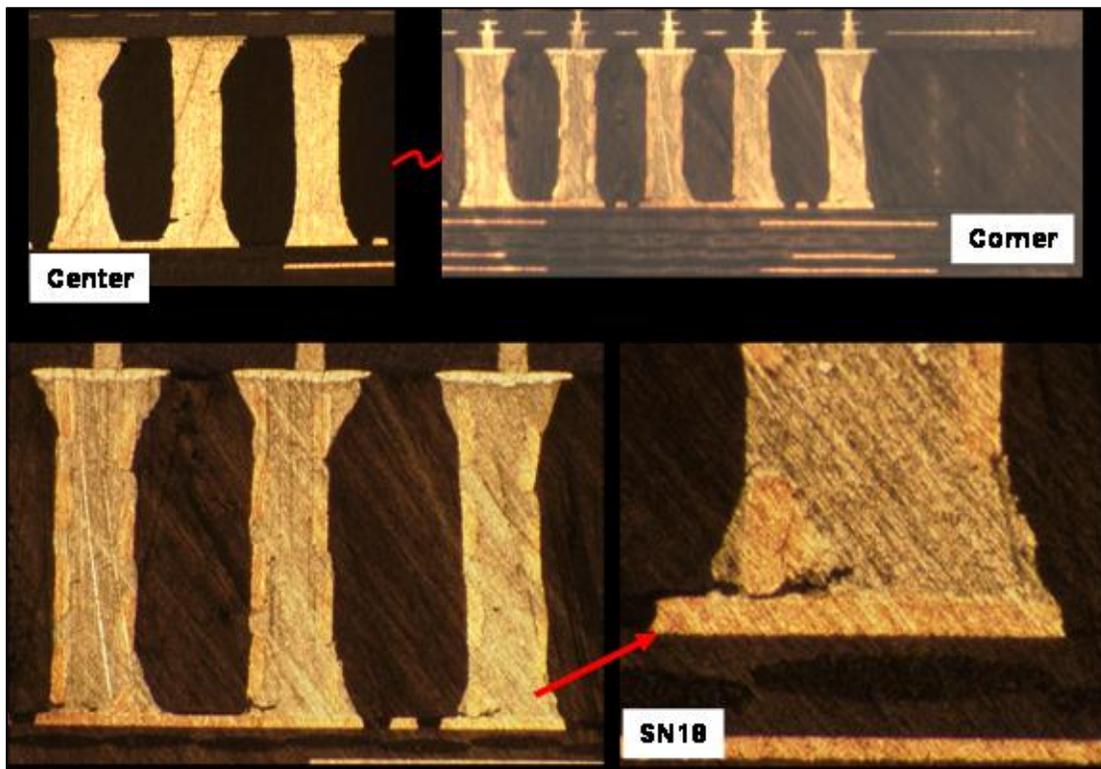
Cross-sectional optical photomicrographs of CGA 717 I/O assembly with non-solder mask defined (NSMD) pad design after thermal cycling.
